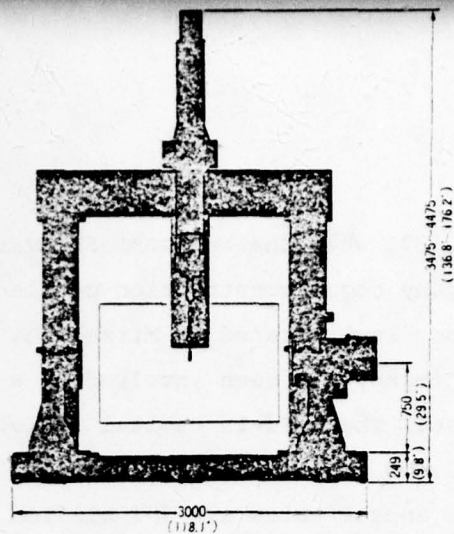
SHIN MEIWA ROBOT WELDER PW 150 SERIES
